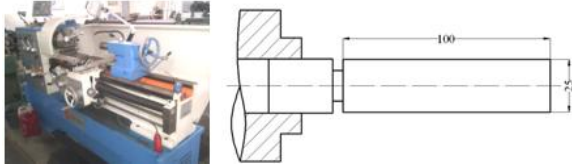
KNUATH DM 1000 A Lathe and Object Dimensions [6]
